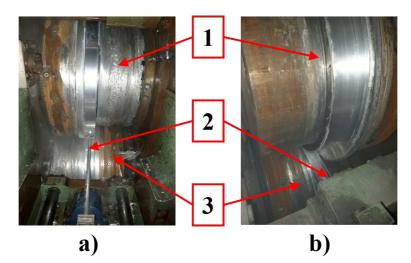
Adherent aluminum on the rolls of the combined rolling and extrusion processa) old geometrical design of the forming chamberb) optimized geometrical design of the forming chamber
